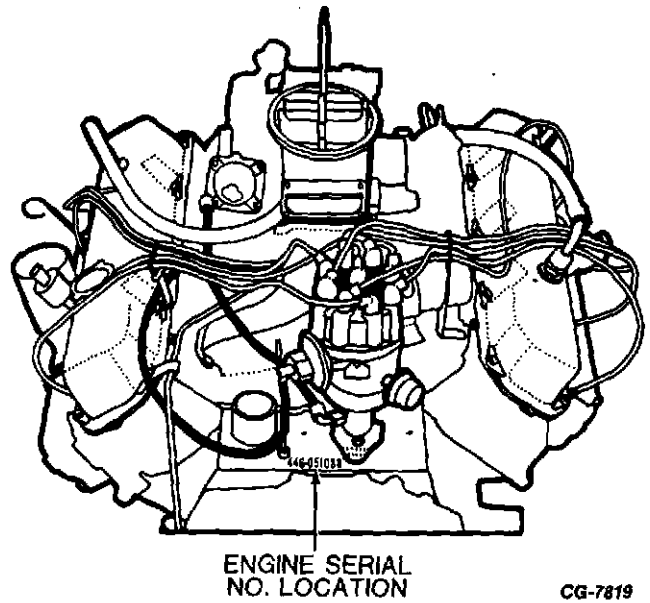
C-446 ENGINES IN FRONT OF DISTRIBUTOR
